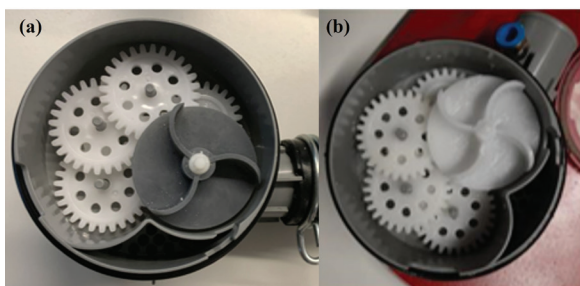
Installation of the impeller to the valve system; a) impeller made of resin reinforced by graphene, and b) impeller made of POM
